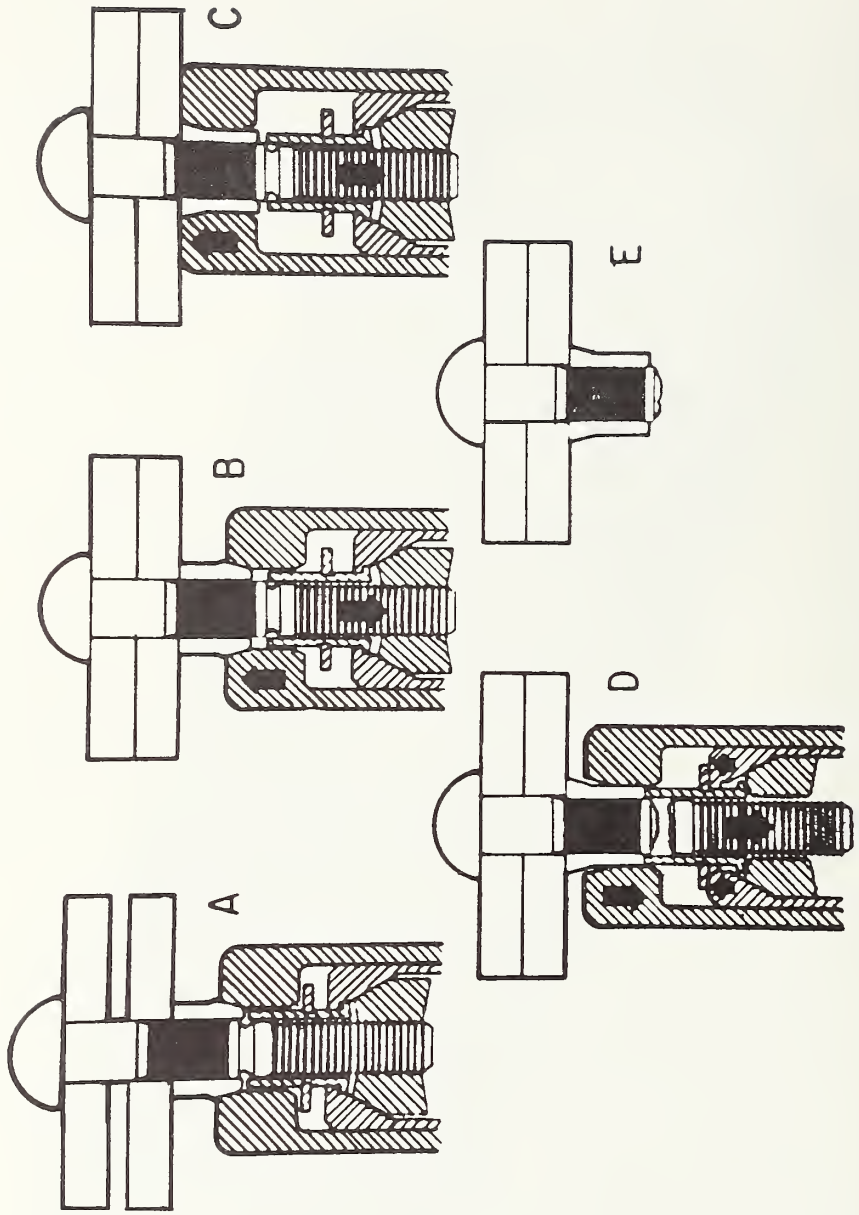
CROSS SECTIONAL OF OUR SPLICE JOINT ARRANGEMENT
